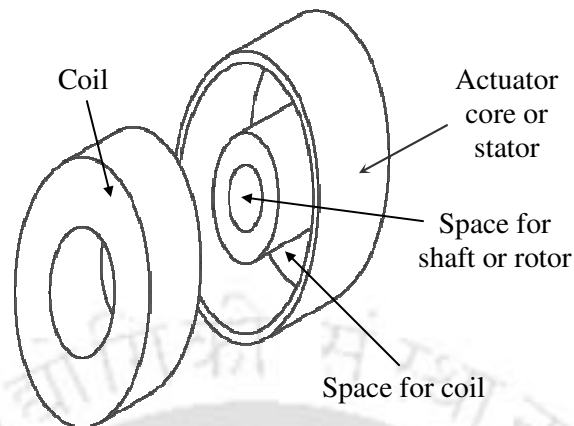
Parts of the actuator of an active magnetic thrust bearing
